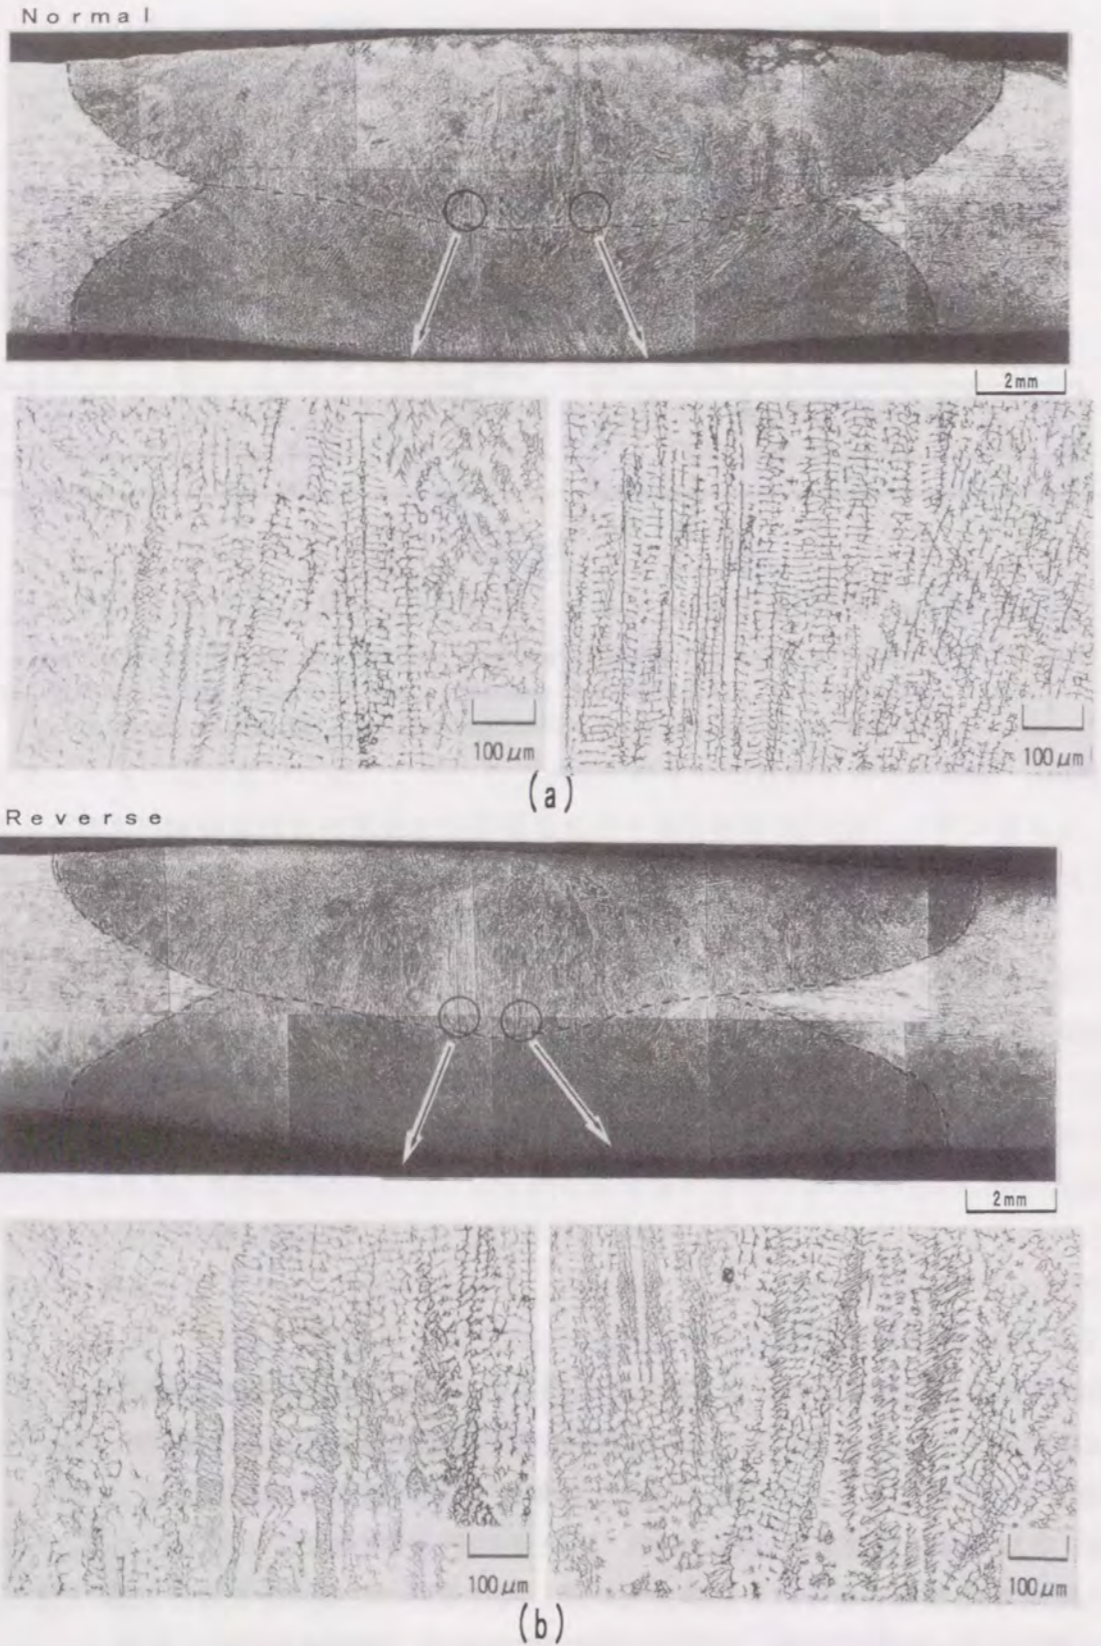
Microstructures in the weld metal formed by different welding direction of the 2nd pass.
